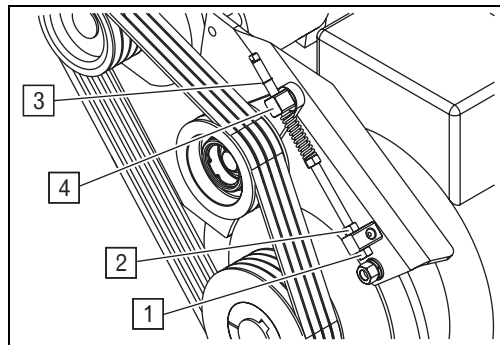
MONSUN V-belt tensioning device over 7.5 kW
